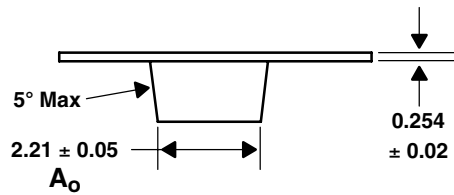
Package FN — Dual Flat No-Lead Packaging Configuration
